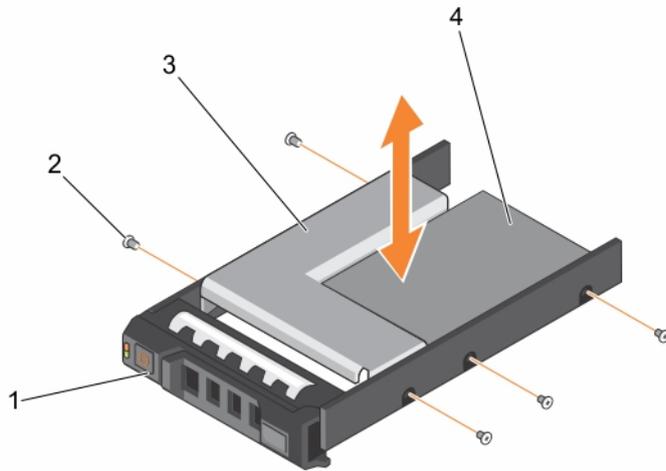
Removing and installing a hard-drive adapter into a 3.5 inch hard-drive carrier
